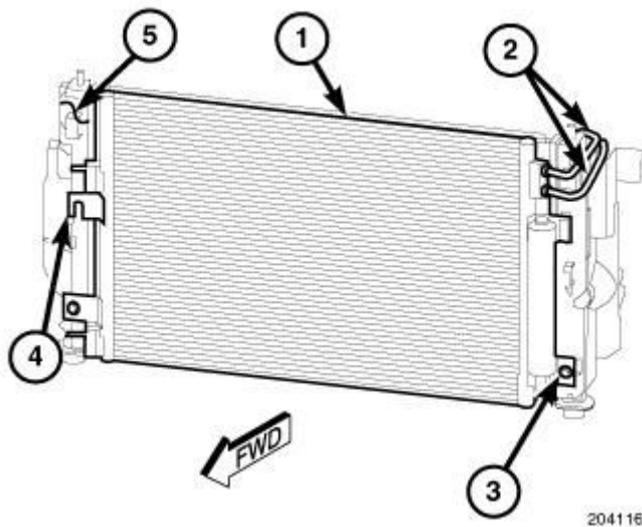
Identifying A/C Condenser, Radiator & Upper Condenser Brackets
